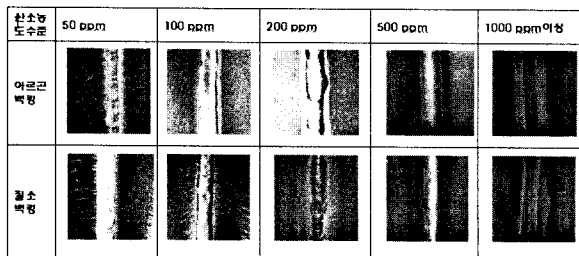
Root weld appearance for Ar and N2 back purging gas
